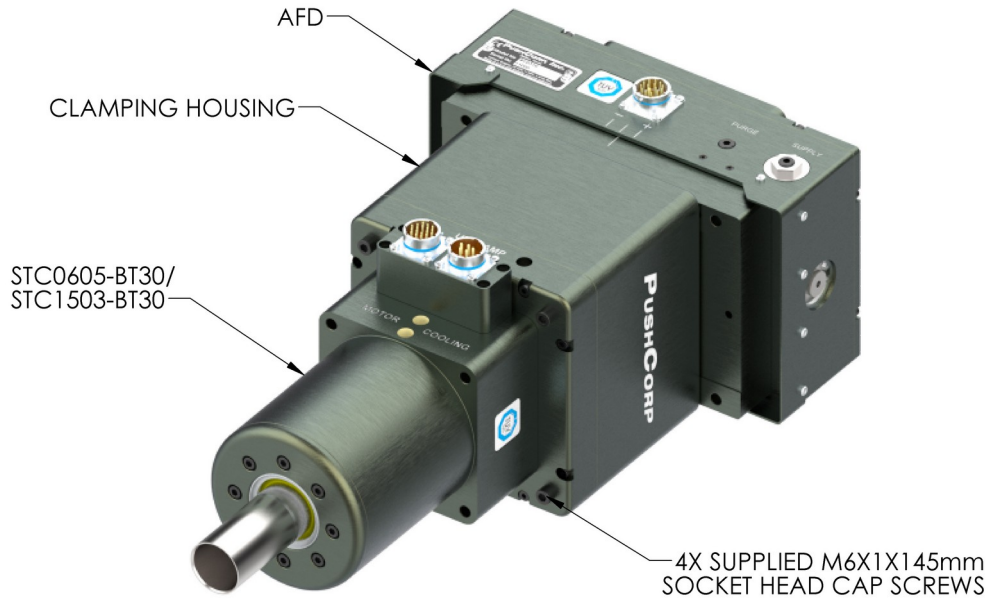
Spindle Motor Perpendicular-Axis Configuration
